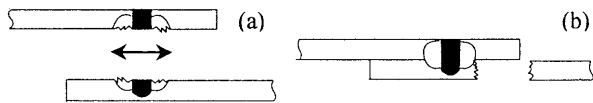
Schematic illustrations of fatigue fracture morphology (aged):(a) High applied load, (b) Low applied load.
